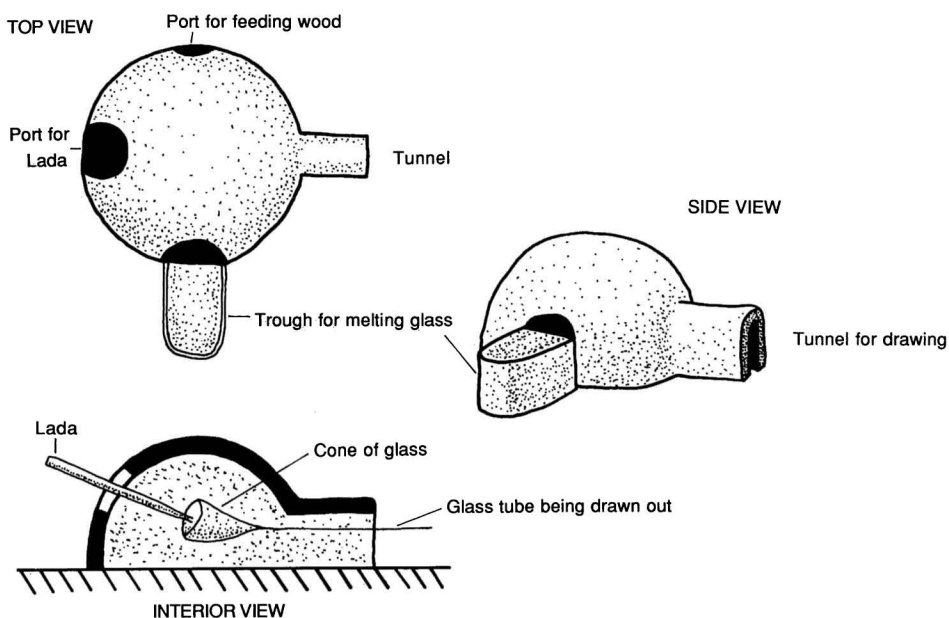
Schematic drawing of the unique furnace used to draw tubes for Indo-Pacific beads.
